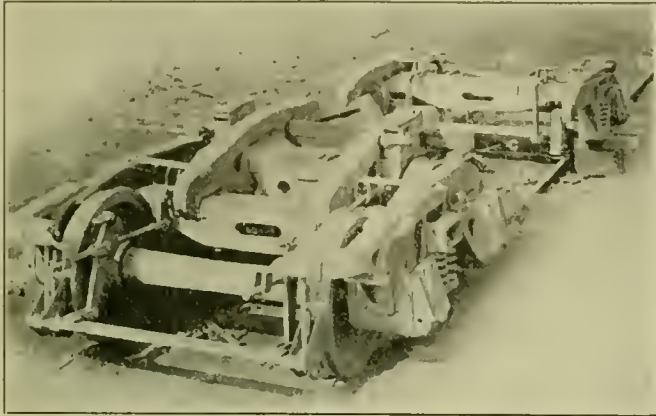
Longitudinal Bolsters Raised and Four-Wheel Section of Truck Rolled Out
